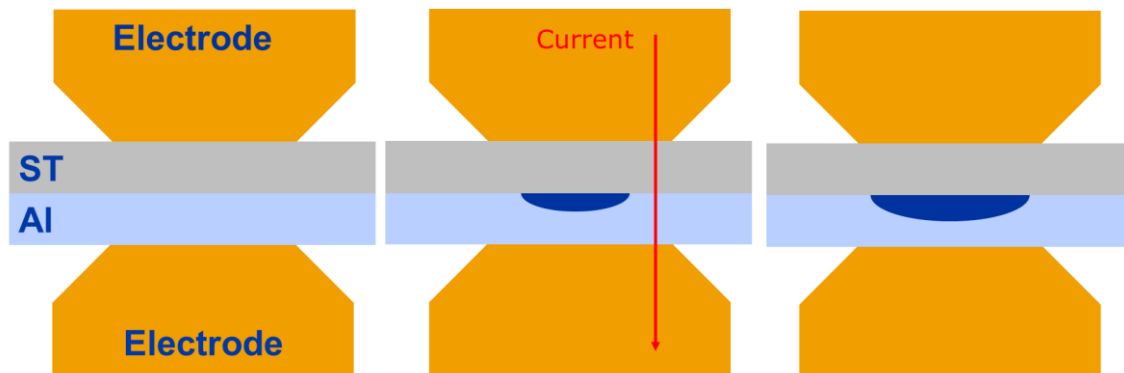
Schematic representation of resistance welding process in a dissimilar steel to aluminium joint
